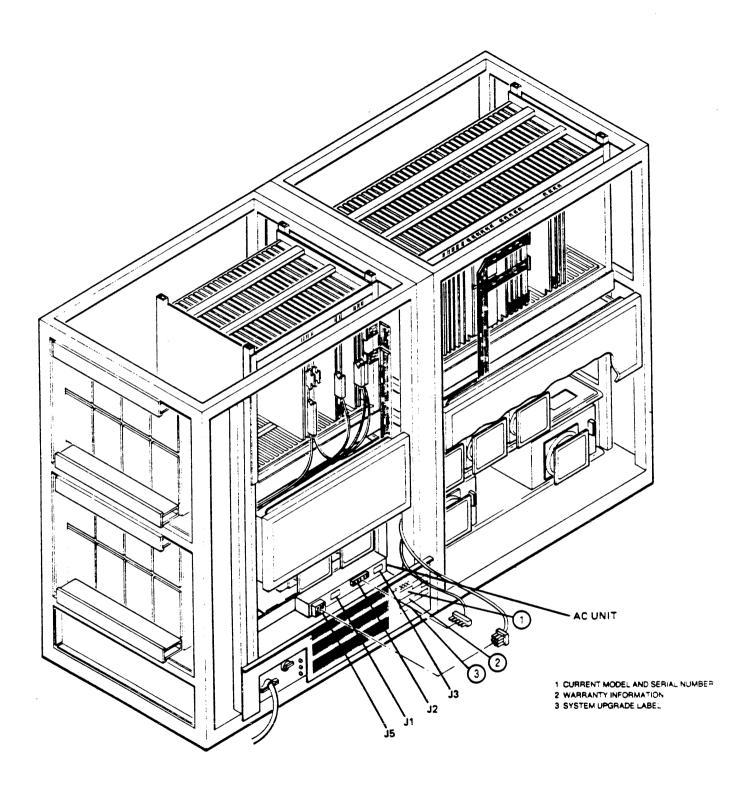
SPU Rear View (HP 32460B/32468B/32468C), Panels Removed.
